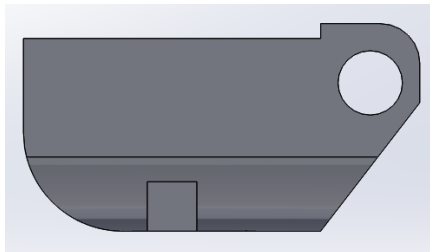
Gen 2 Finger; Distal Phalange; Side View
